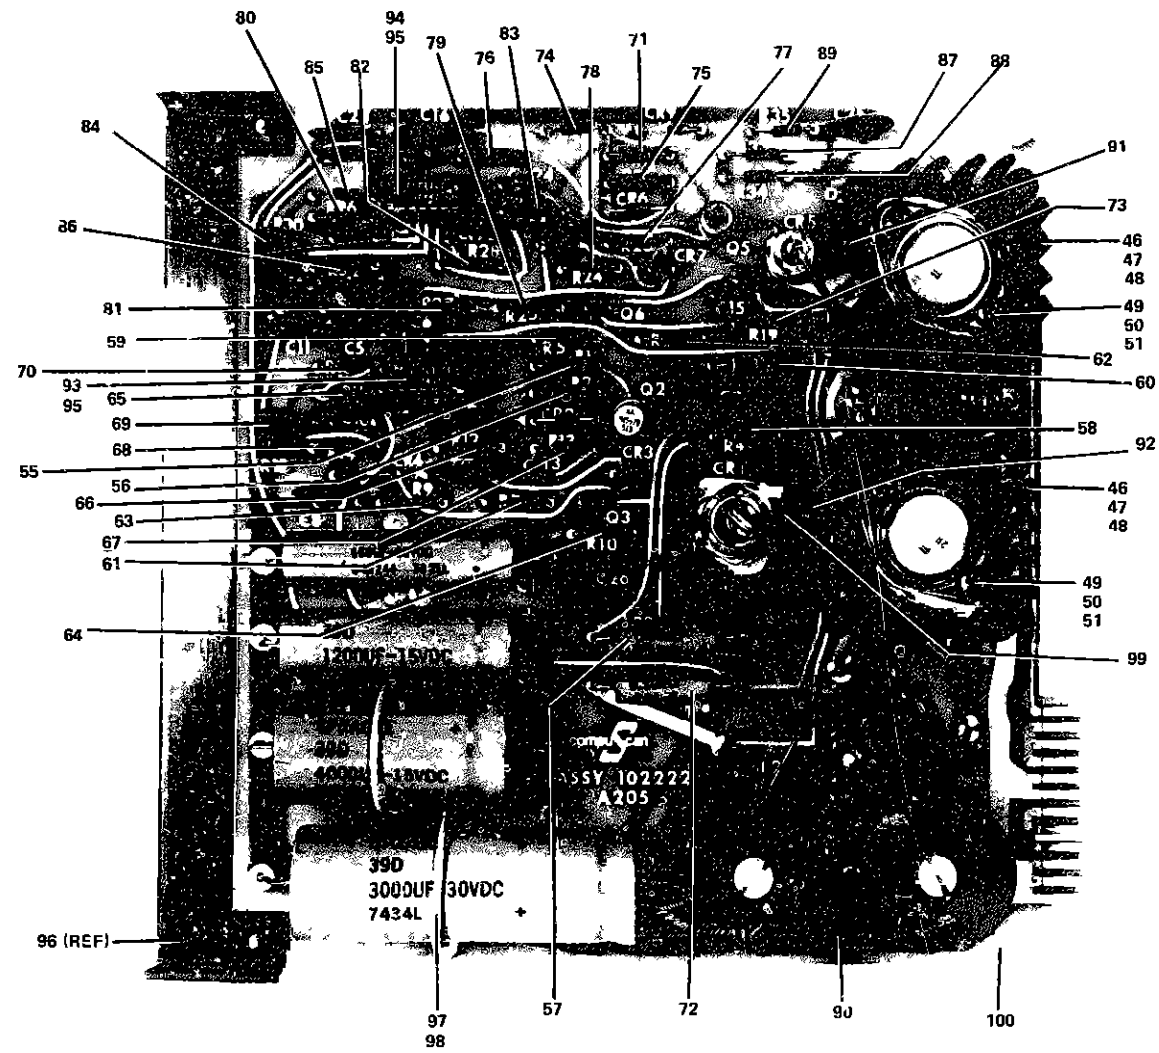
+12 Volt Read and Head Lamp Power Supply Assembly 1A2A2 (Sheet 2 of 2)
